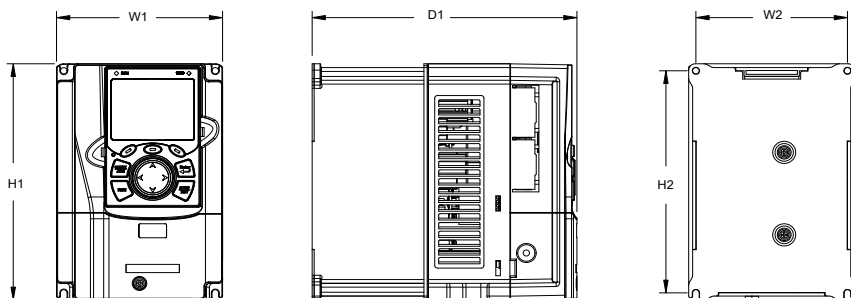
Wall installation diagram of inverters of 220V 0.75–15kW and 460V 1.5–37kW
